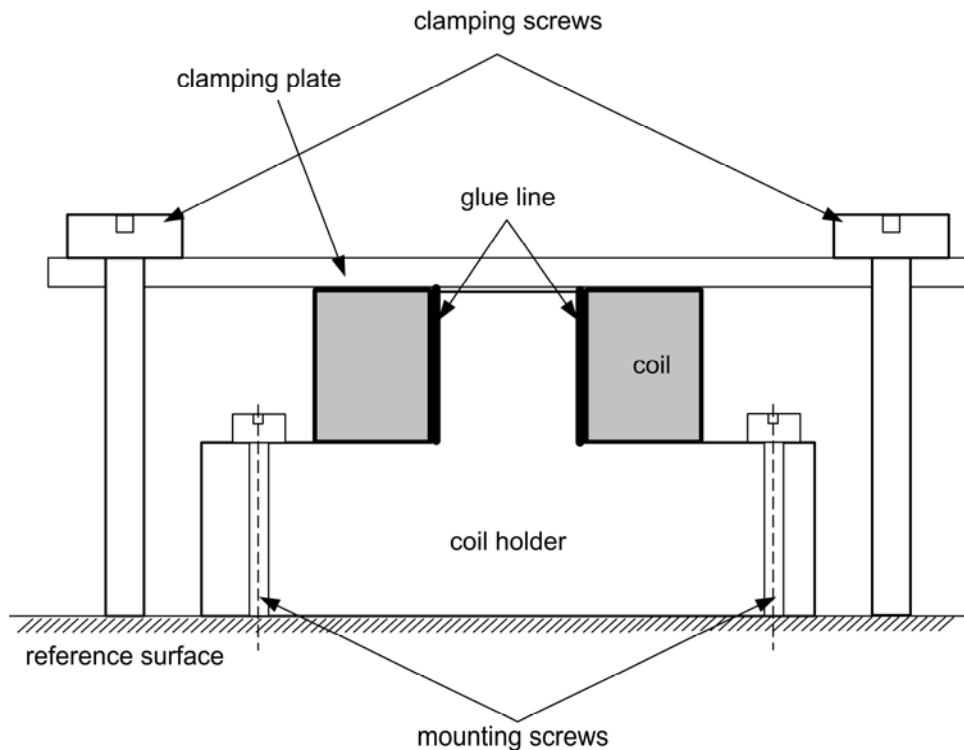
Fixture for gluing horizontal coil with coil holder.
